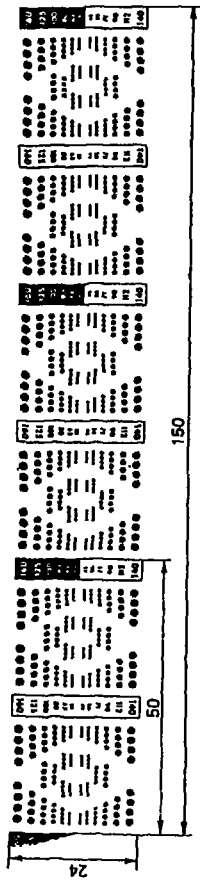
Diagram of a mira strip, approximately scale 1 : 1; actual dimensions shown in millimetres
